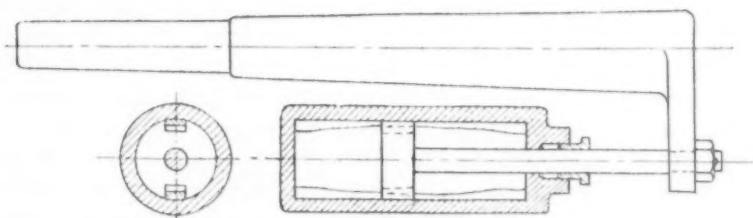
DIAGRAMMATIC SKETCH OF BRAKE CYLINDER FOR CHECKING RECOIL
